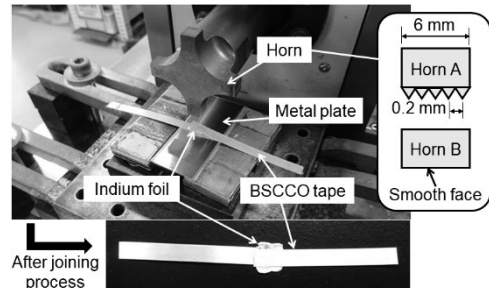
Ultrasonic welding machine and its joint sample.
